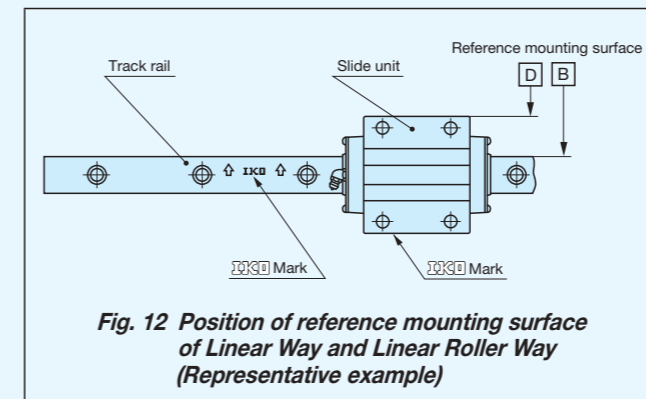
Position of reference mounting surface of Linear Way and Linear Roller Way (Representative example)
